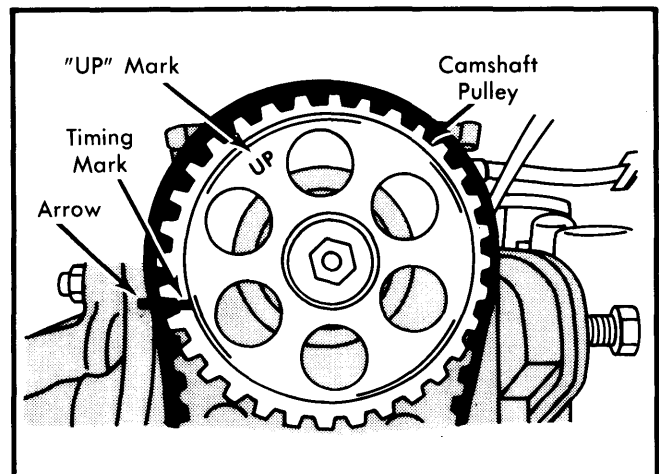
Camshaft Alignment Marks in Position for Installing Camshaft Belt (1751 cc Engine)
